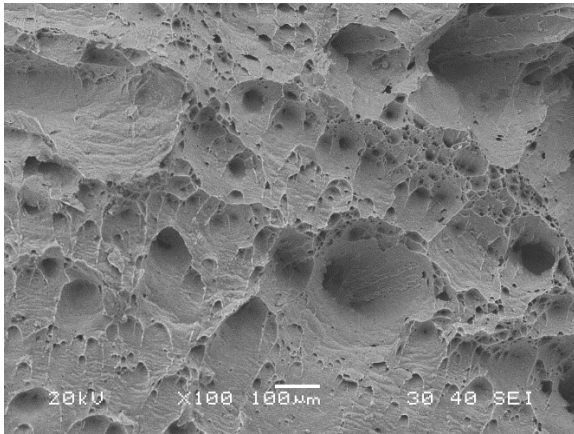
Magnified view of area 2 in weld 16
